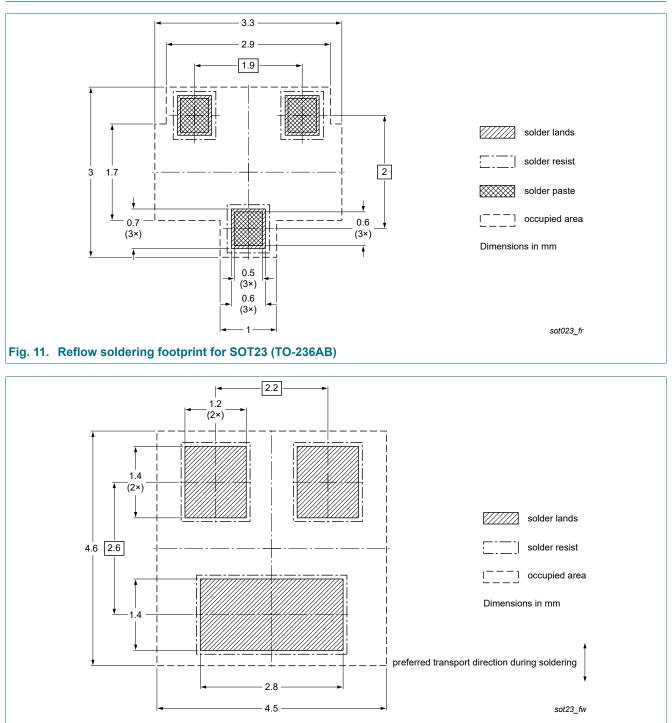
Wave soldering footprint for SOT23 (TO-236AB)
